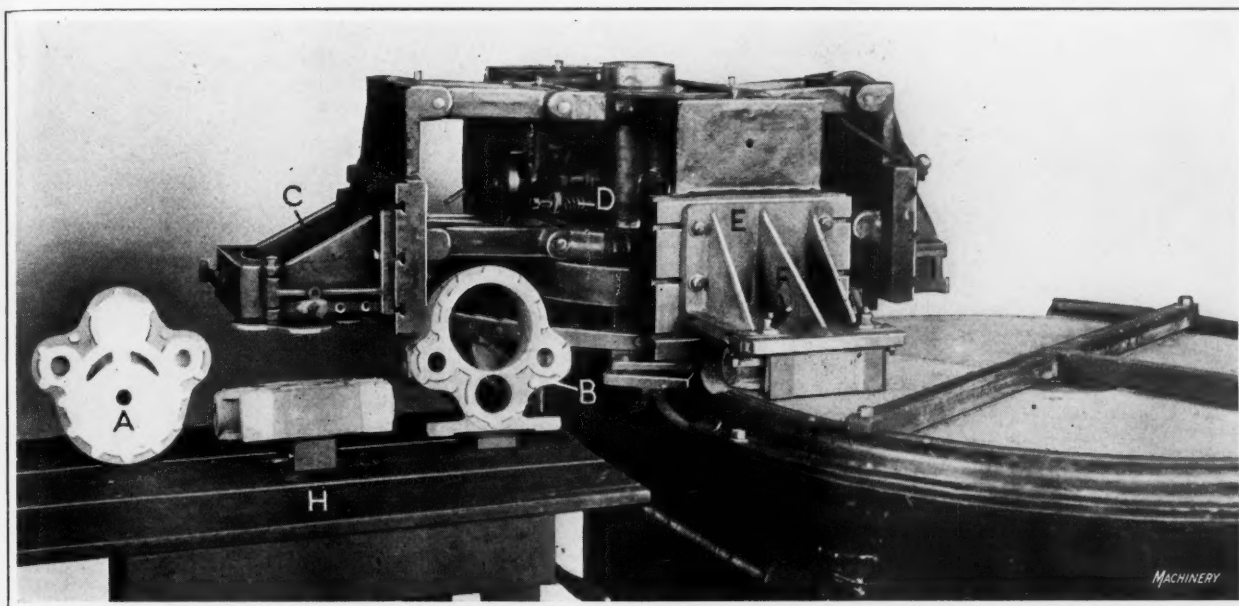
Continuous-feed Disk Grinder equipped for grinding Liquid-air Pump Castings
